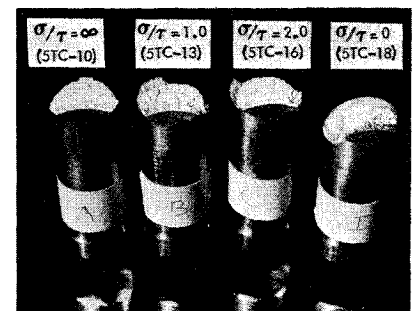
Fracture surfaces of titanium specimens subjected to cyclic tensile and torsional loadings.
